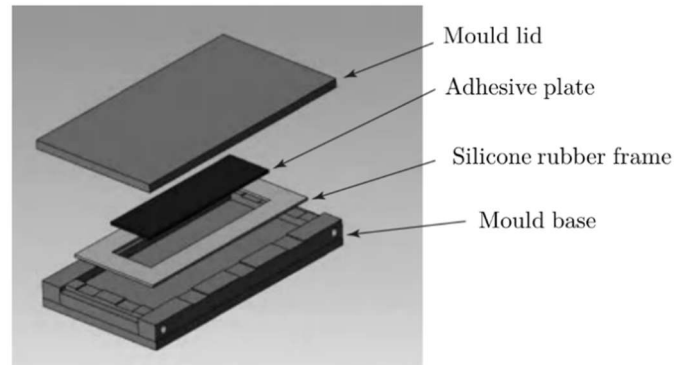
Schematic view of the mould and the silicone rubber frame [48]
